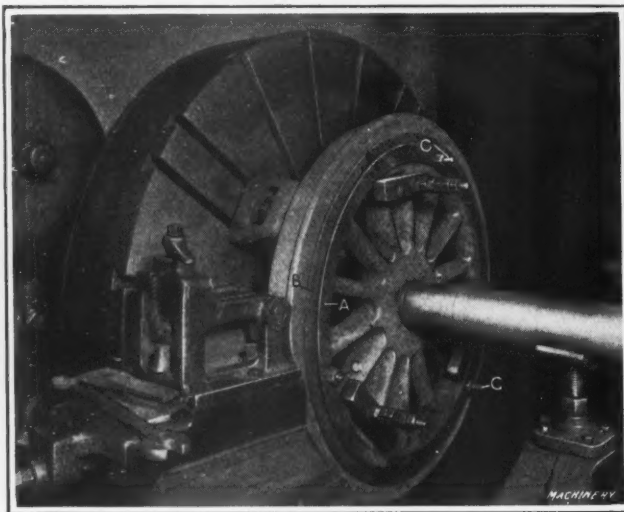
Close-up View of Special Expanding Arbor used for re-turning Locomotive Wheel Tires
